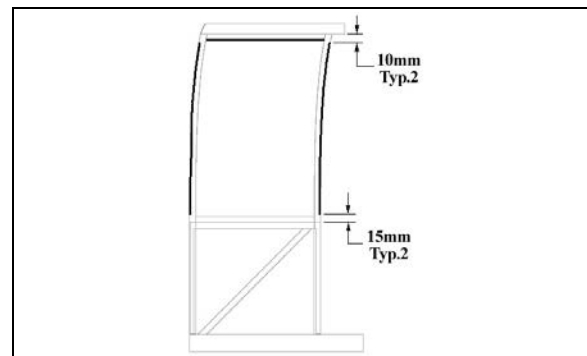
SIDE FIXED WINDOW – ¼ X ½ DOUBLE FACE ADHESIVE TAPE INSTALLATION
